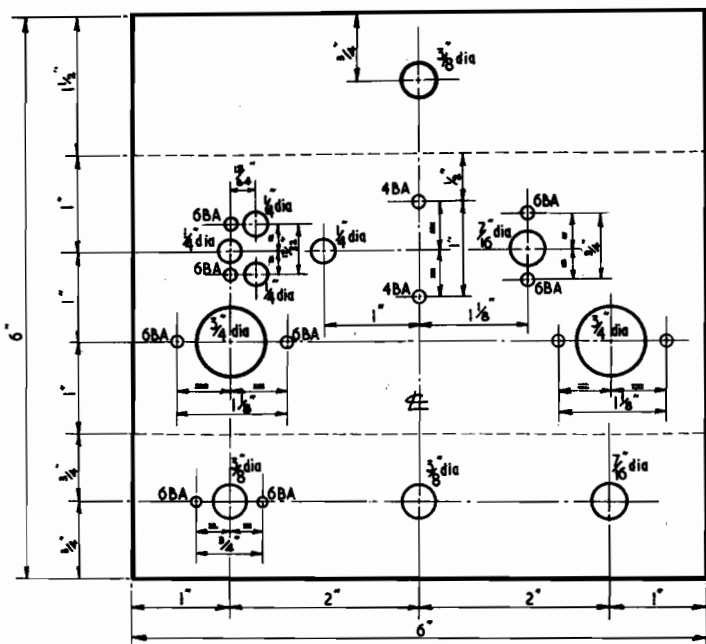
Drawing showing chassis drilling dimensions. The chassis sides should be bent upwards on the dotted lines shown
